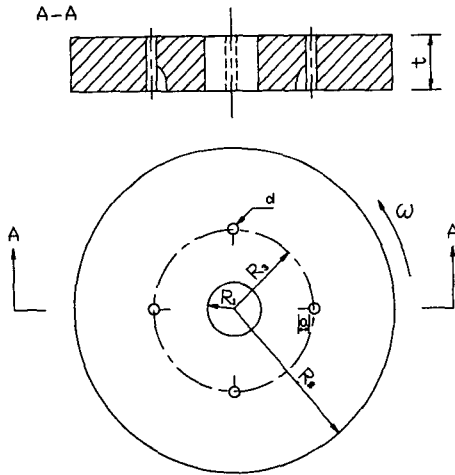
Geometry of rotating disc with a quarter elliptical corner crack at each bolt hole
